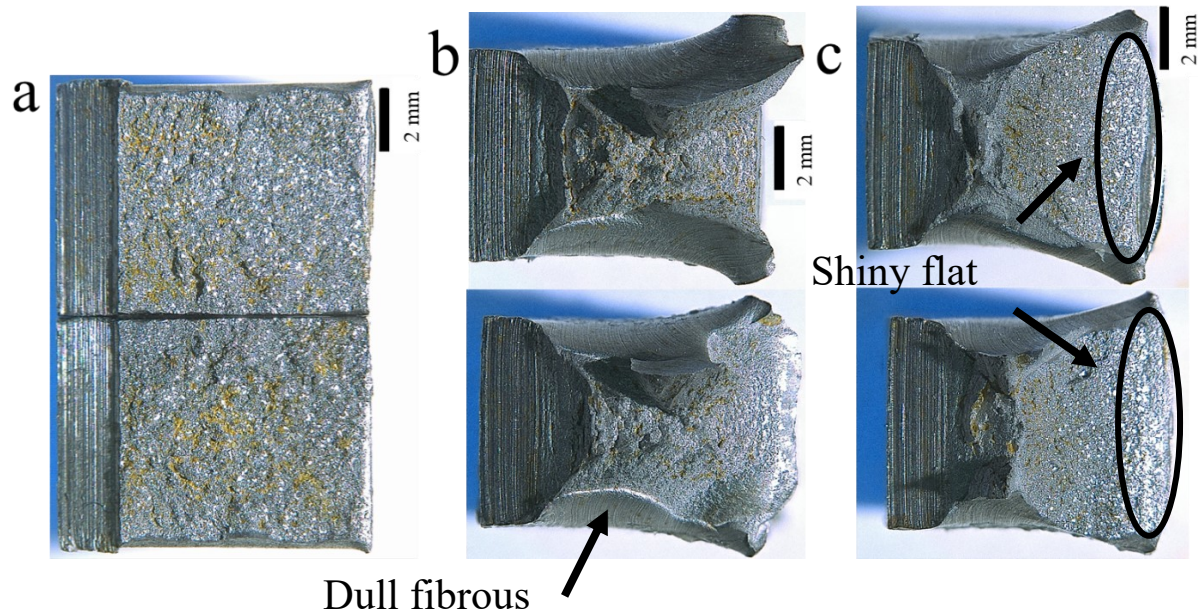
Optical macrographs of fracture surfaces after testing at -30°C for the a) CW0-Ref., b) CW40 and c) CW80 samples.
